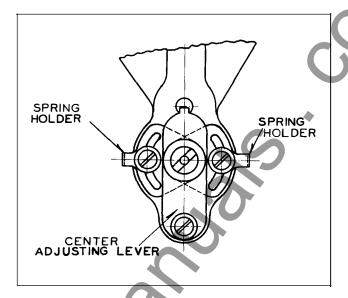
Detail of the Spring Holders and Center Adjusting Lever.
